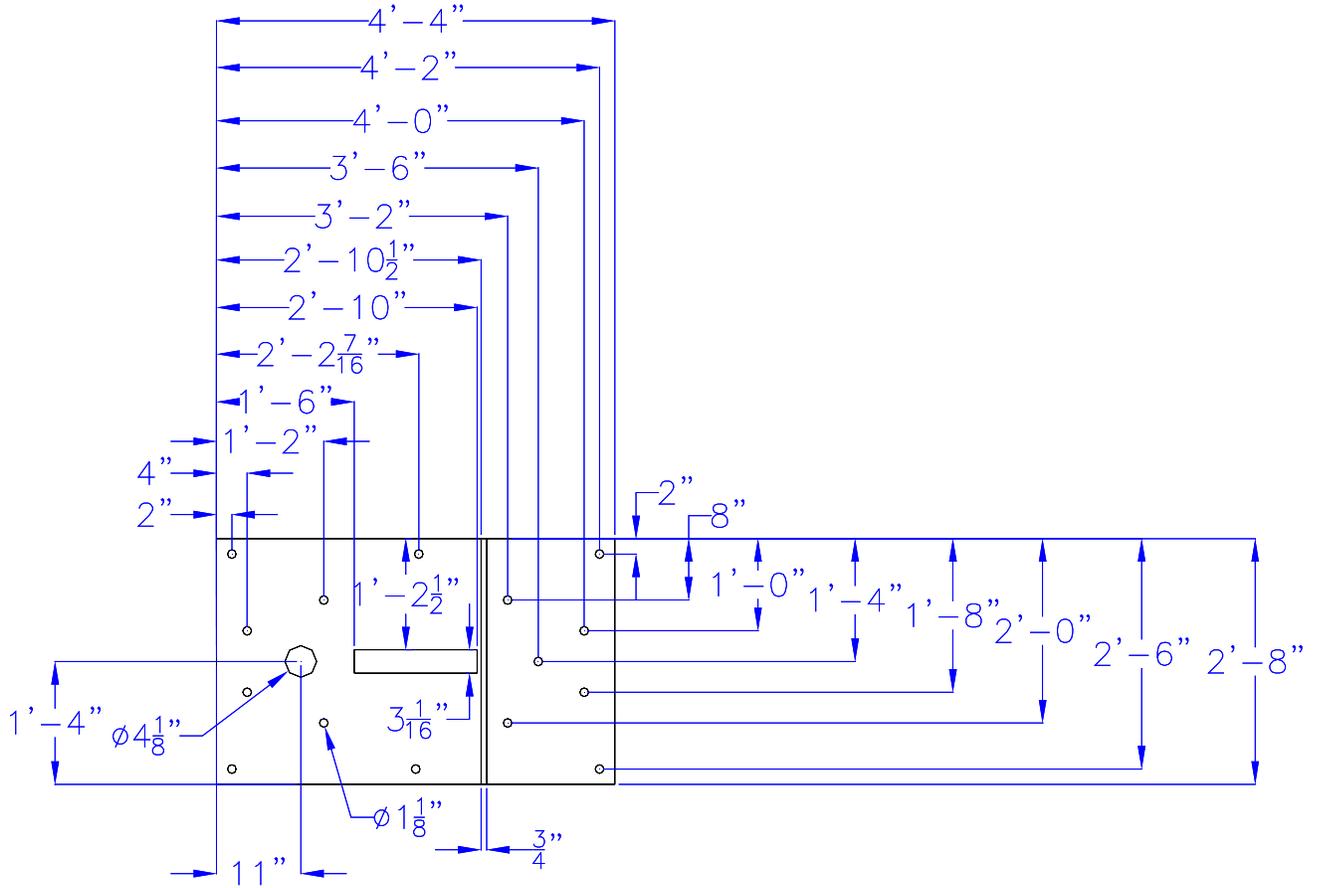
Expedient Anchor Plate Plan View with Dimensions for Bolt and Steel Anchor Post Holes (Pour Holes Not Shown)
